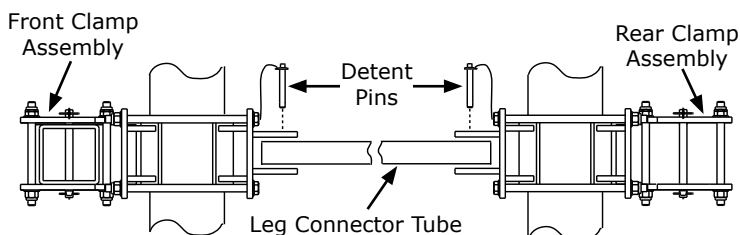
Towing Kit Installation and Use - Fork Pocket Style
